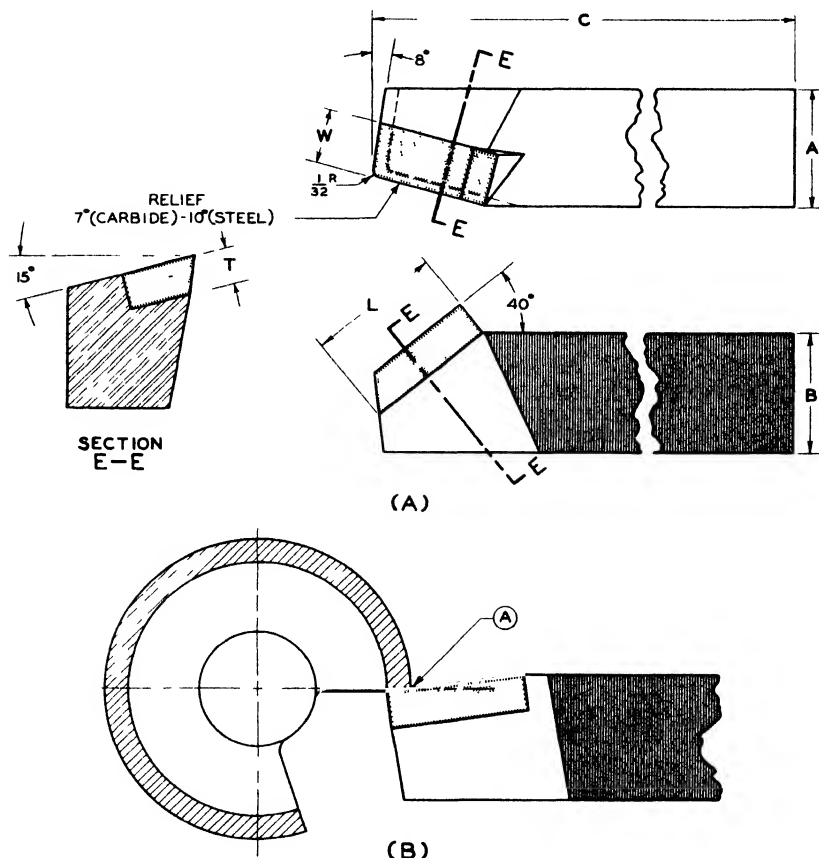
The Shear-Type Tool (A), and How the Shear-Type Tool Works in an Interrupted Cut (B)
